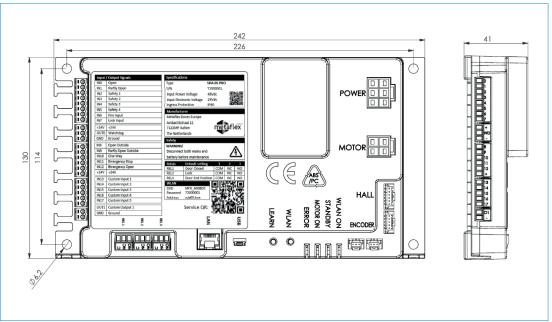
Dimensions SDA-05 and SDA-05 PRO
